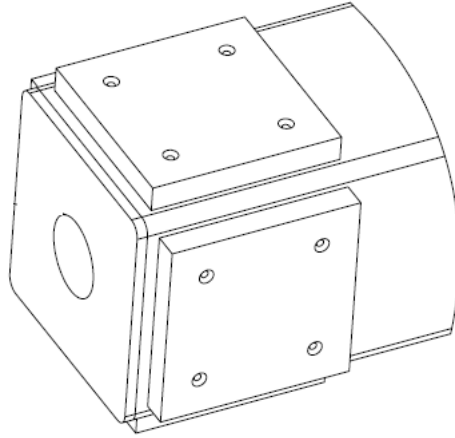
Four aluminum plates bolted to the steel tube in one of five locations.
